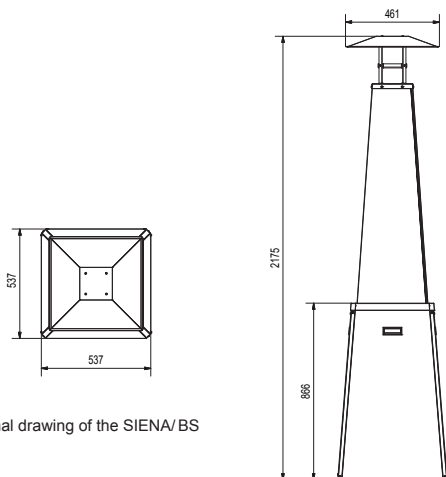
Dimensional drawing of the SIENA/BS versions.
